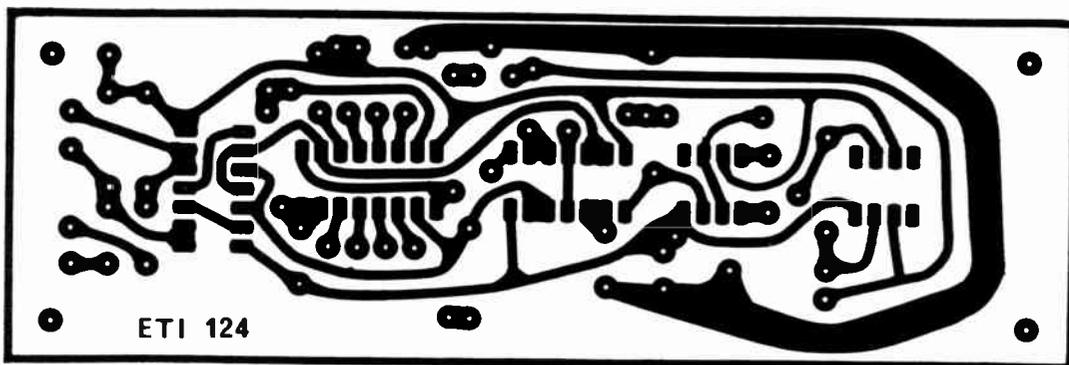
Printed circuit board for the Tone Burst Generator. Full size. 142 x 47mm.
